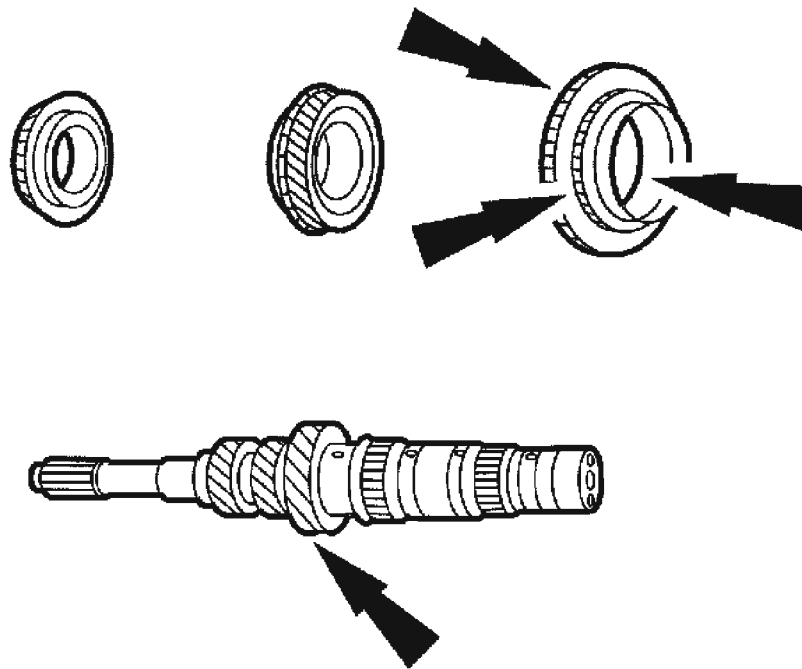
Discarding 3rd And 4th Gear Synchronizer Assembly
